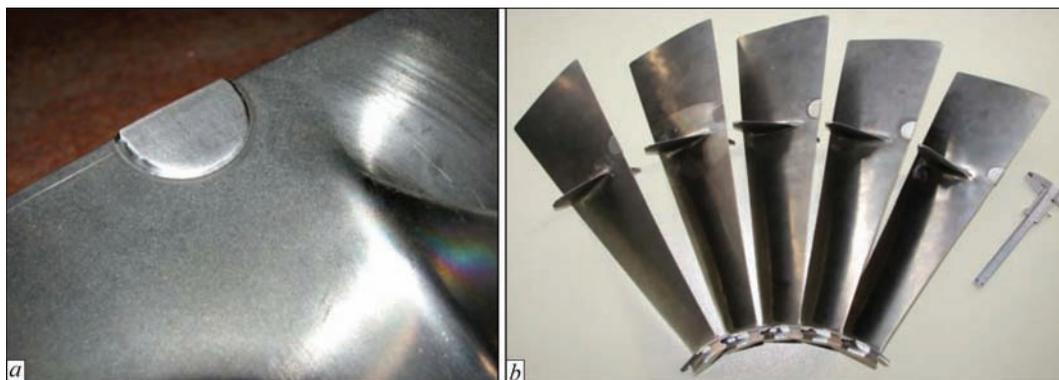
Repair of spot defects of main part of blade airfoil edge using cylinder repair «welded-in pieces»: *a* — cylinder repair «welded-in piece» at airfoil edge (its edge was cut out at initial mechanical treatment after EBW); *b* — pilot batch of GTE LPC blades with cylinder «welded-in pieces» on airfoil blade (before final mechanical treatment)
